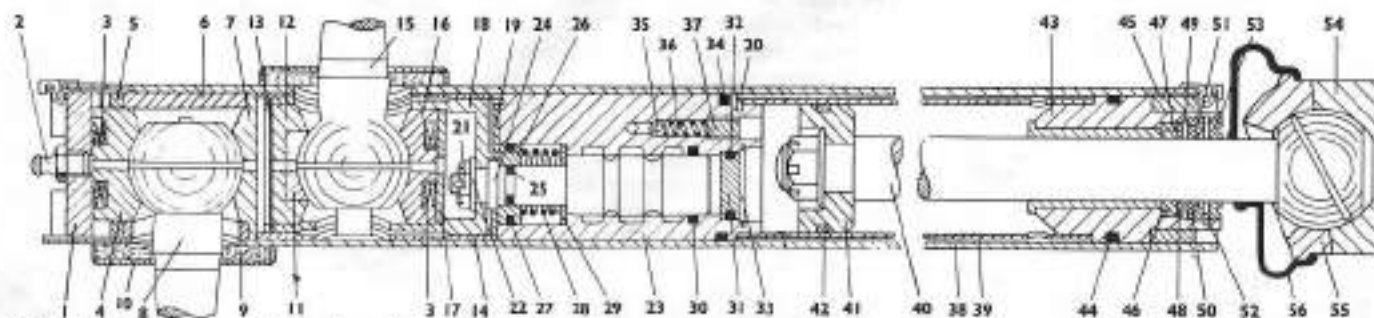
Cross-sectional view of reactive type steering cylinder and control valve assembly used on early model 880 and 990 tractors. Refer to Fig. 24 for exploded view of unit.
